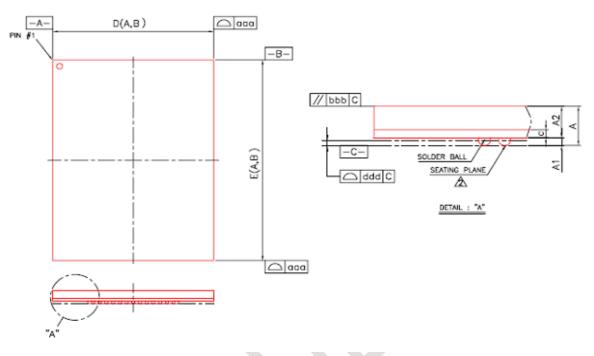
INAND Extreme Specification Top and Side View (Detail A)
